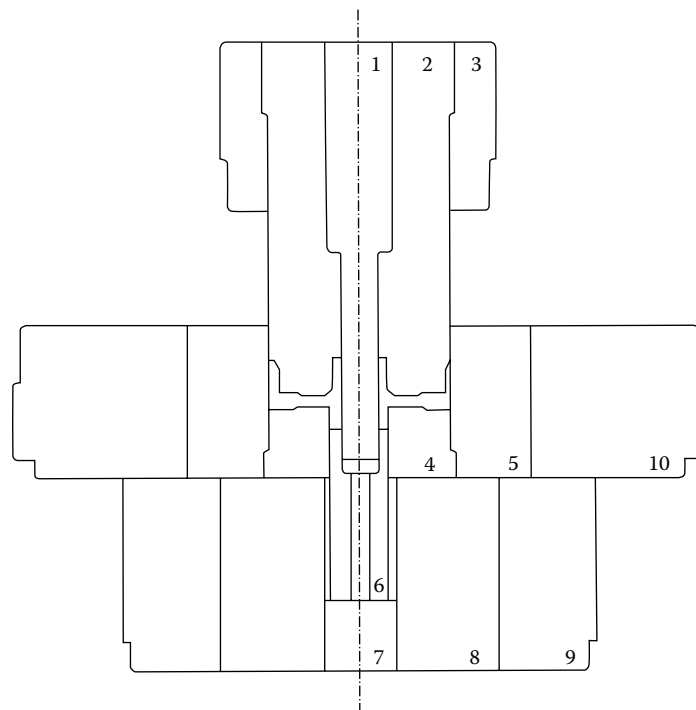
Tool set up for die forging of video drum, Miyamoto Industry Co. 1. Punch, H13 = SKD61, 53 HRC; 2. Punch, H13 = SKD61, 53 HRC; 3. Punch cover, H13 = SKD61, SKD61, 53 HRC; 4. Die insert, D2 = SKD11, 55 HRC; 5. Die, H13 = SKD61, 50 HRC; 6. Ejector, D2 = SKD11, 55 HRC; 7. Pressure pad, M2 = SKH51, 55 HRC; 8. Pressure pad, H13 = SKD61, 53 HRC; 9. Pressure pad cover, D2 = SKD11, 55 HRC; 10. Shrink ring, D2 = SKD11, 55 HRC
